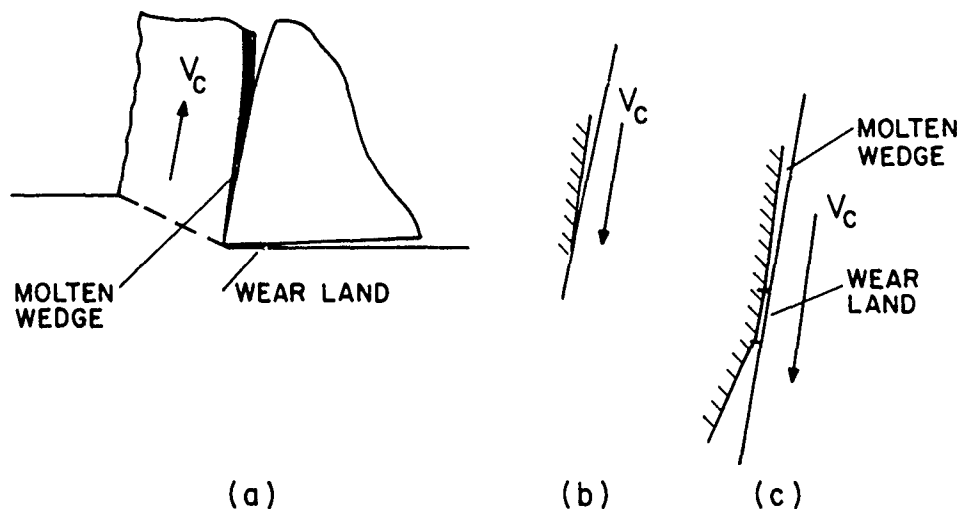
Hydrodynamic Pressure Generation in metal cutting a) cutting tool in operation with wedge shaped molten film of material between chip and tool, b) kinematical equivalent of a) and c) developed view of tool face - wear land combination.
